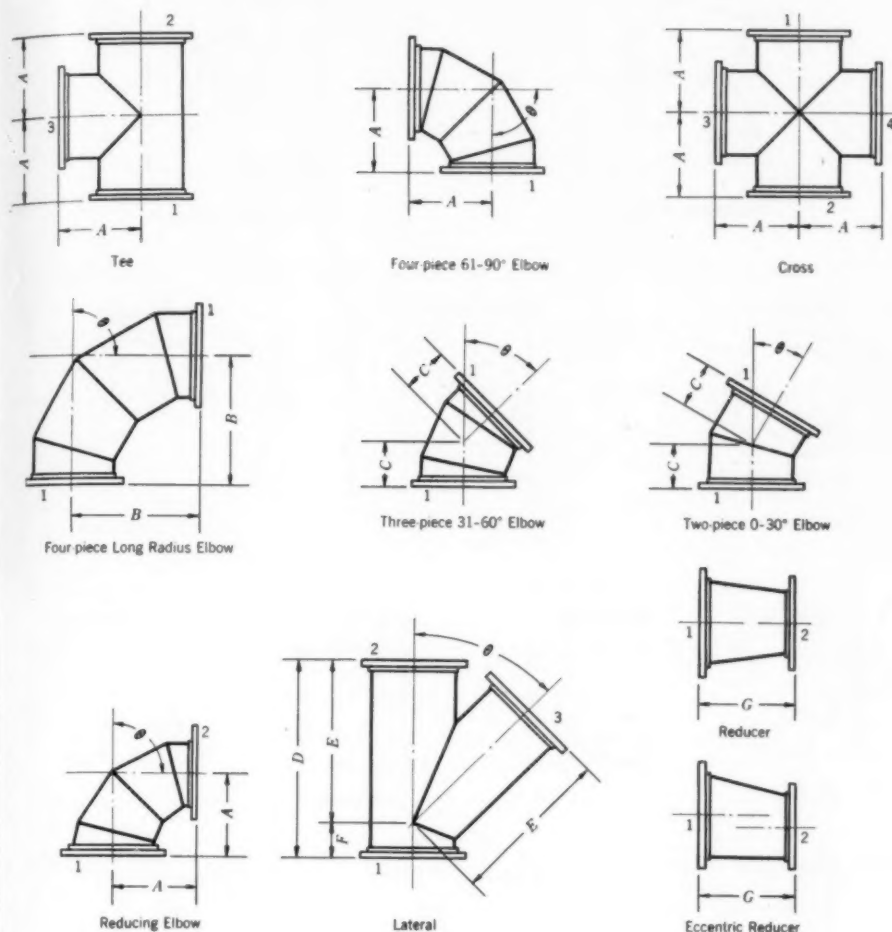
Welded Fittings for Flanged-Joint or Welded-Joint Pipe
